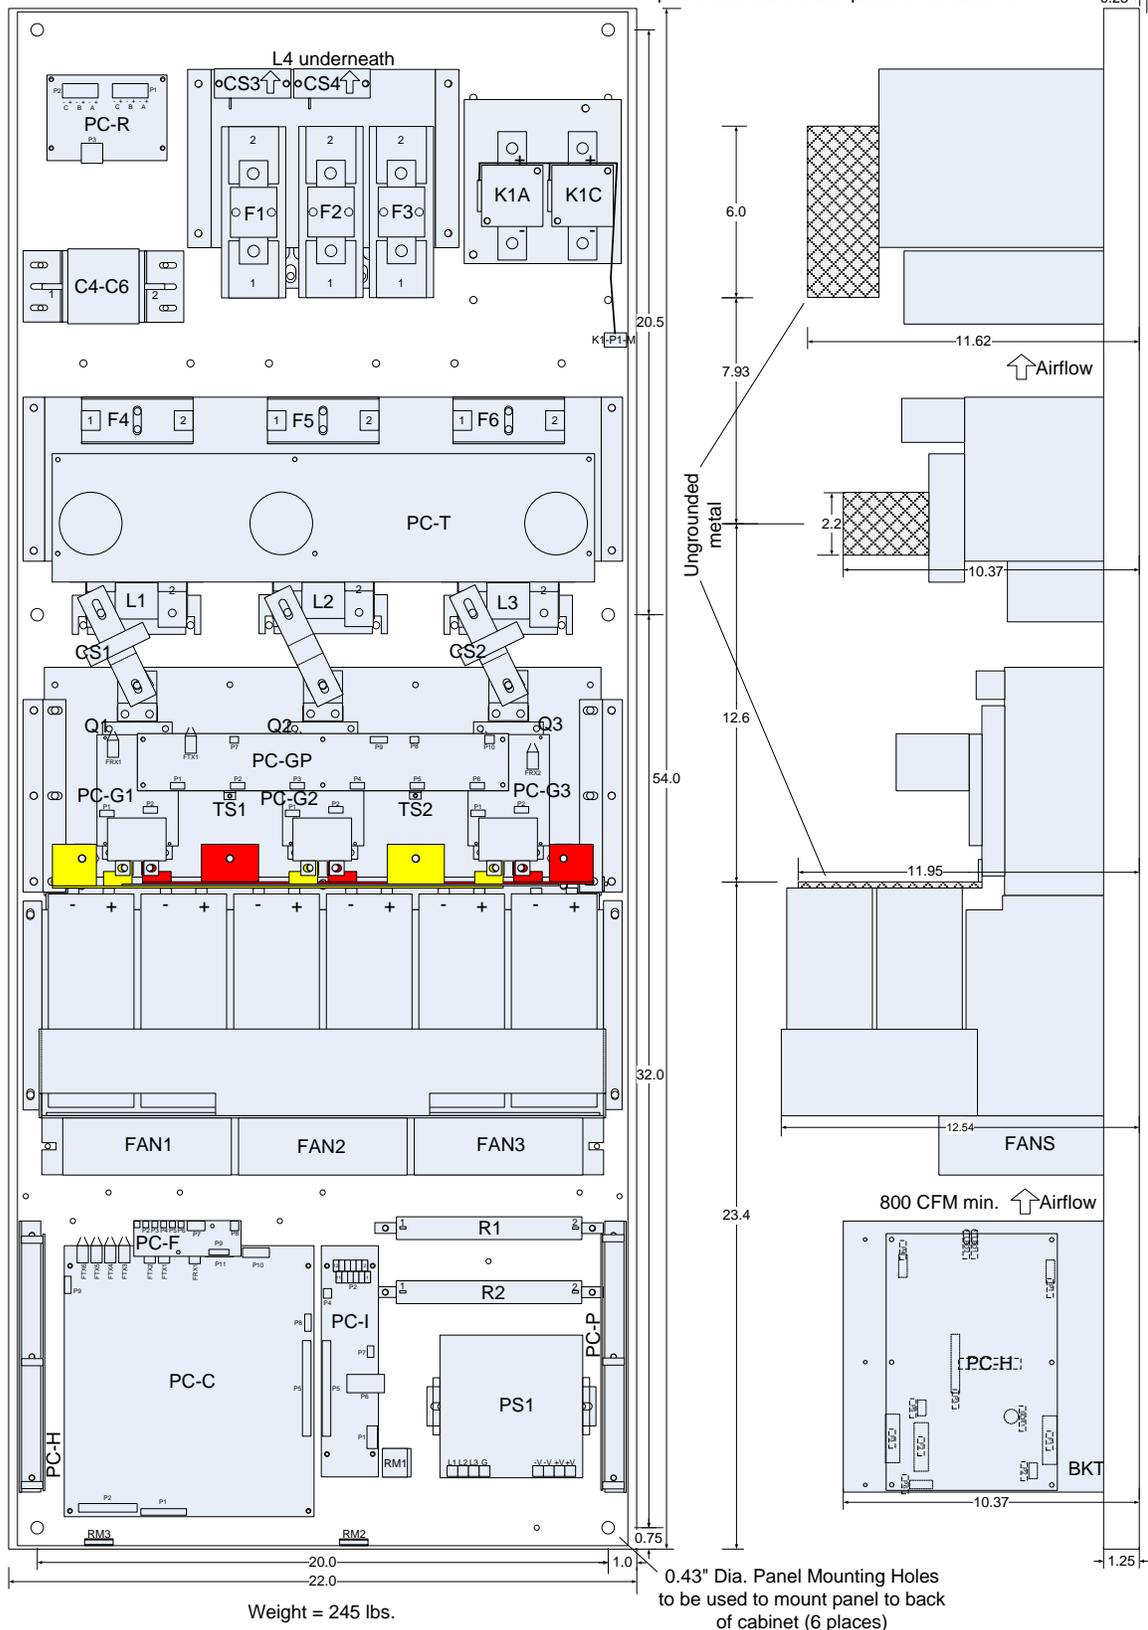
150 Amp DPM Panel Layout Drawings
